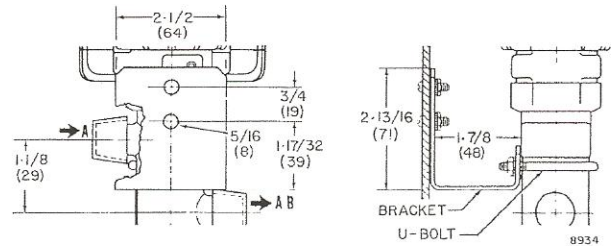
Bracket No. 313827A Dimensions in Inches (Millimeters).
